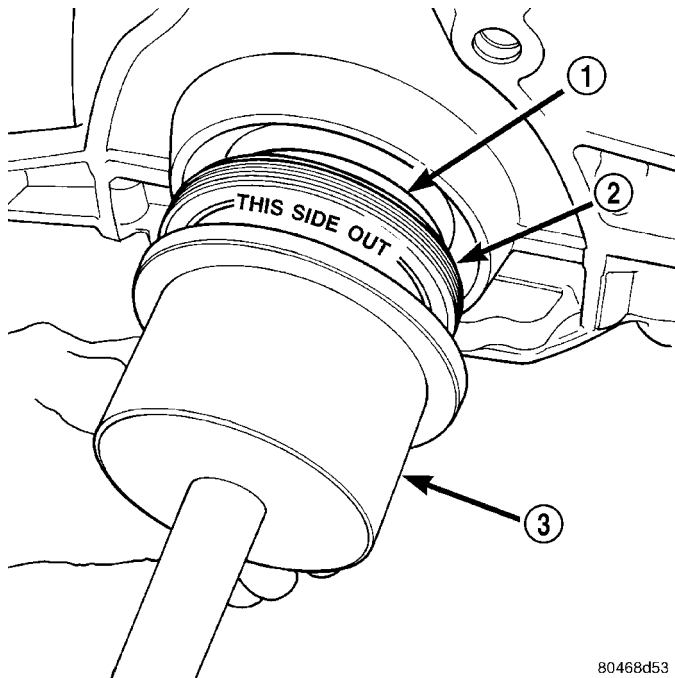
Crankshaft Rear Seal and Special Tool 6926-1
